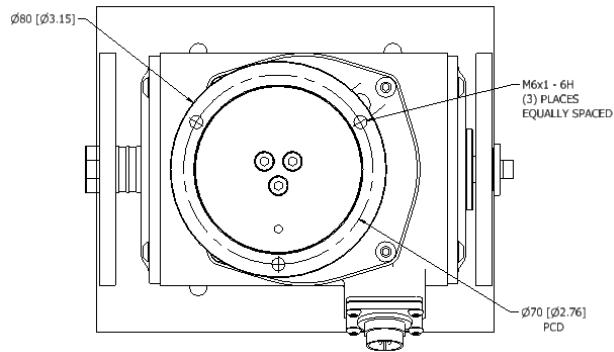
AP-8 OTT, AP-8 Side Mount, Mounting Pattern (Bottom of Positioner)
